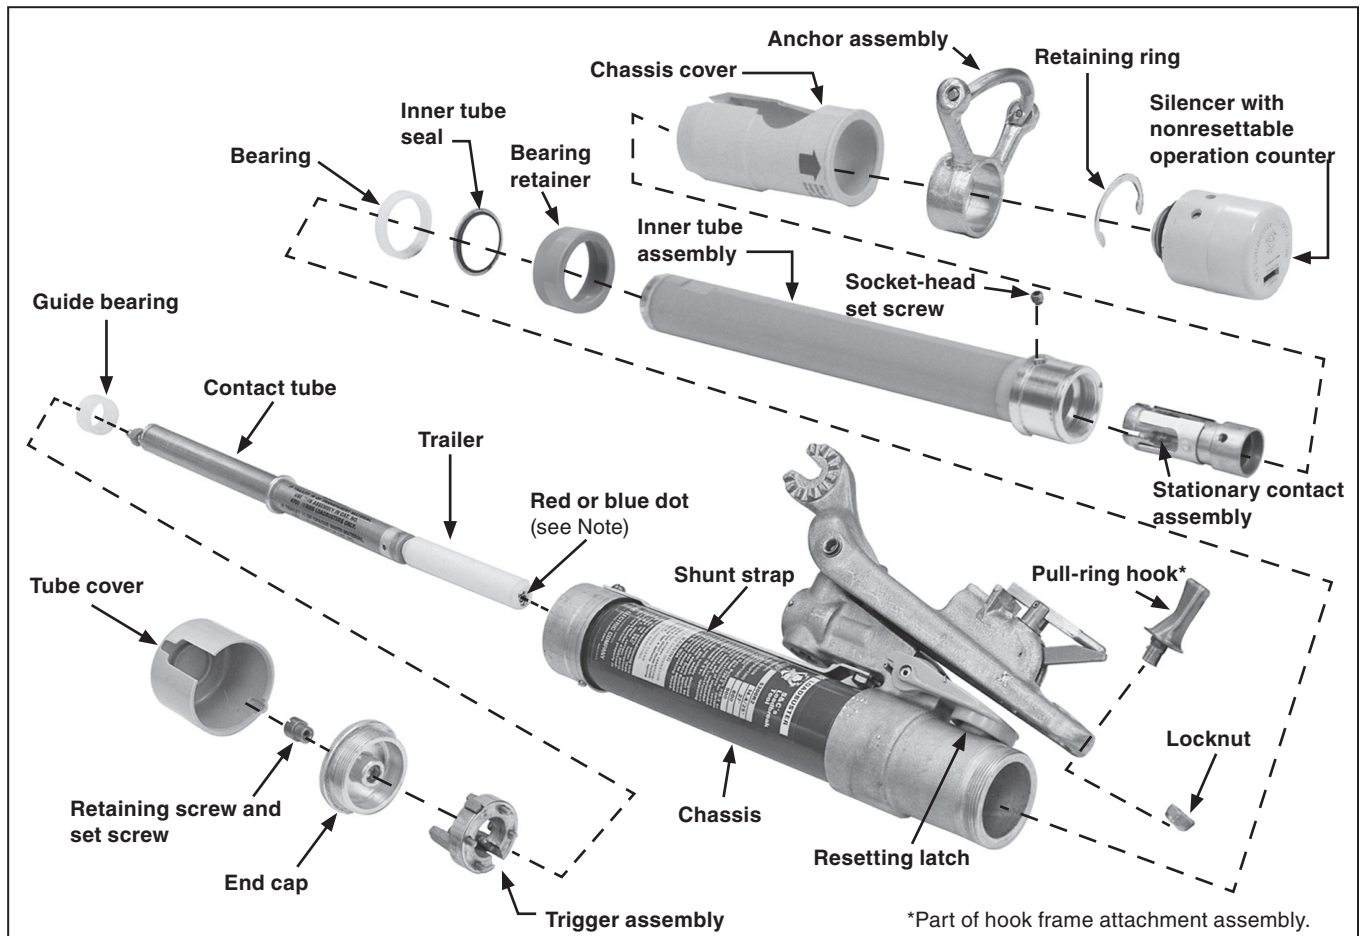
Replacement Parts for Loadbuster—The S&C Loadbreak Tool (exploded view of the Loadbuster tool).
